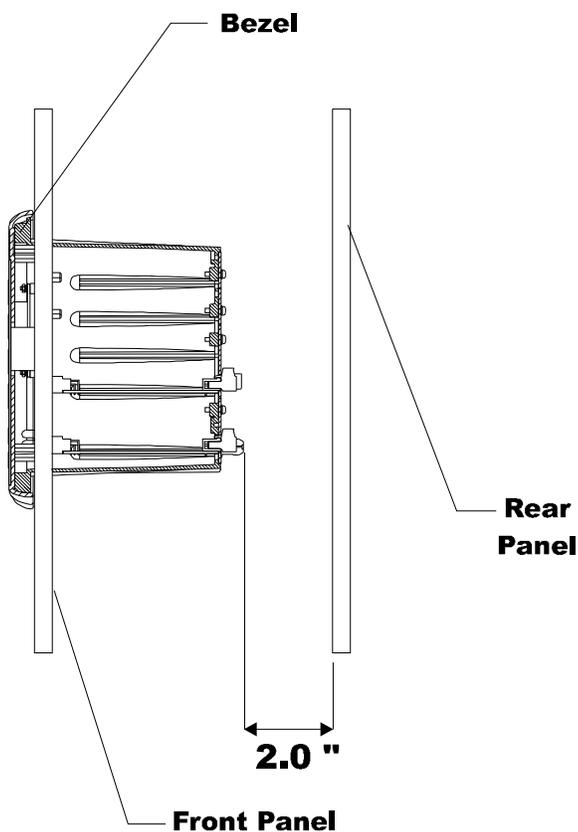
REAR PANEL CLEARANCE REQUIREMENT
